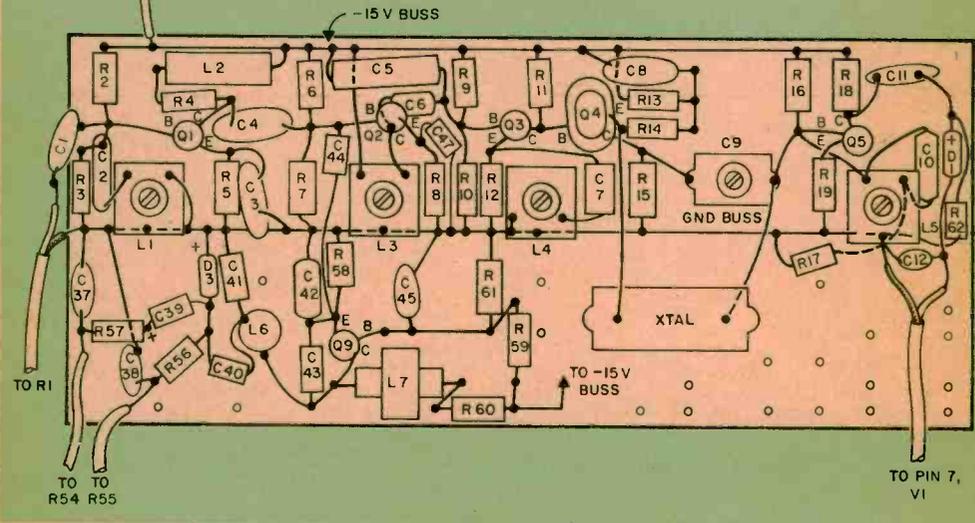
Right side of monitor. IF board is held to top of cabinet with two small brackets. Leads connecting board to other circuits should be long enough so it can be removed for alignment and adjustment if necessary. All parts except C40 (on IF board below) are mounted on top. Try to follow our parts arrangement carefully and use the ground buss to prevent oscillation problems.
